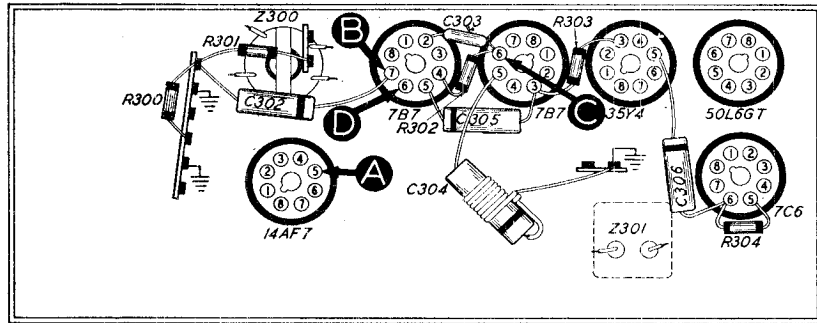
BOTTOM VIEW, SHOWING SECTION 3 TEST POINTS
